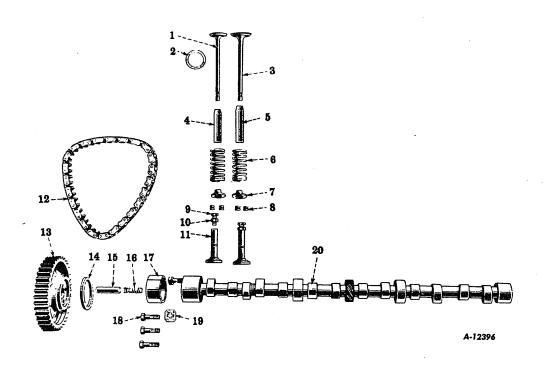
ENGINE CAMSHAFT AND VALVES
